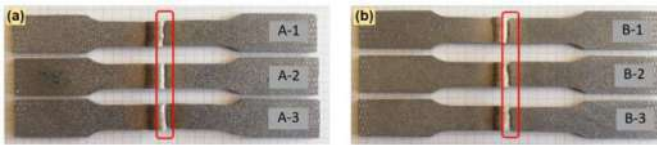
Rupture images of welded specimens after tensile test a) specimens coded A and b) specimens coded B.
